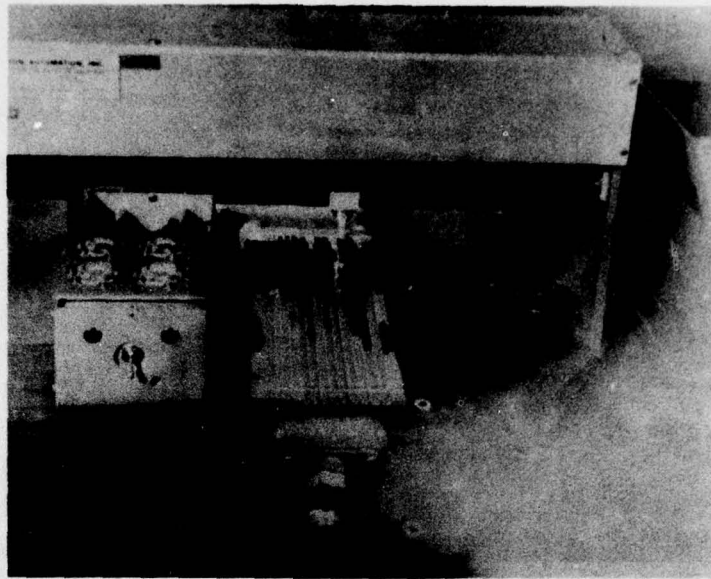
Close-up of robot: left, work table; center, vibratory feeder.
